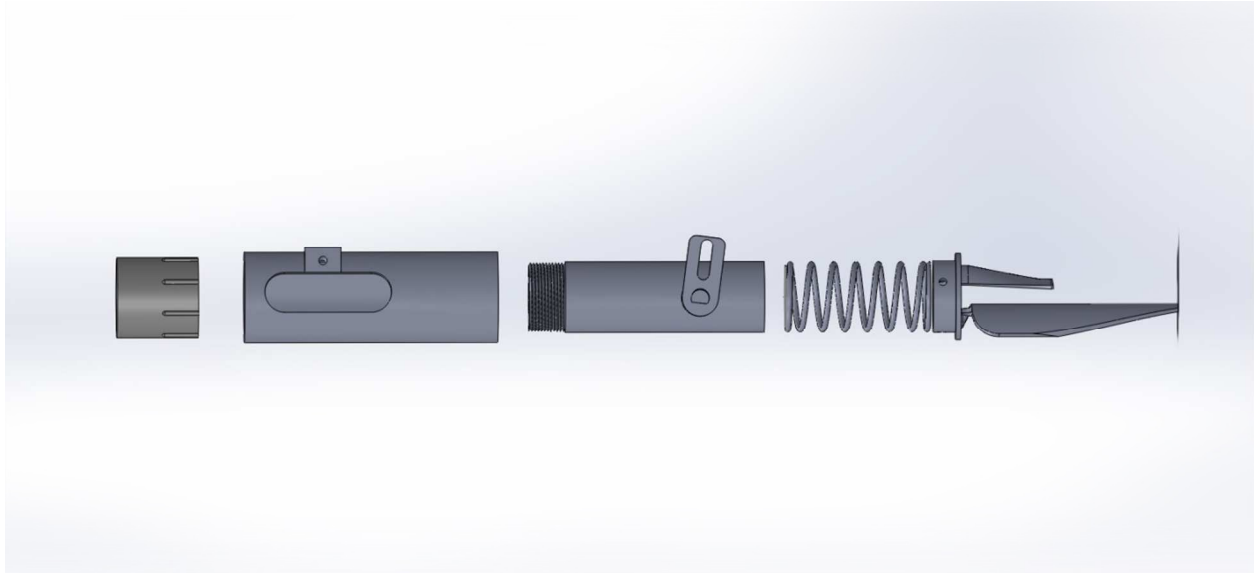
Side view of the hand planter showing (left to right, coupler, external housing, internal housing with rotating arm, spring and planter tip, Oklahoma State University.
